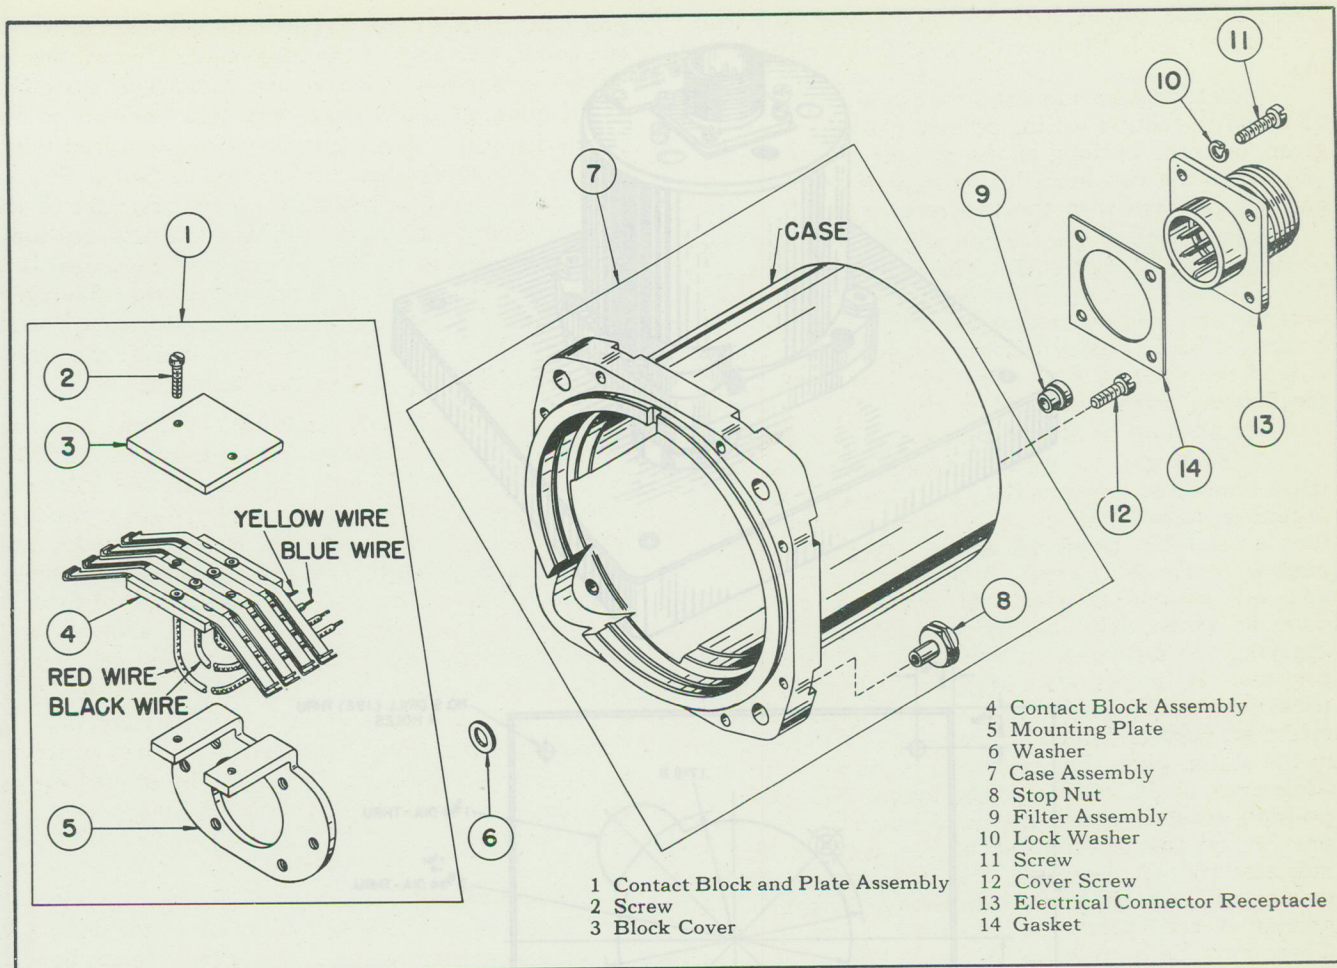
A—Exploded View—Case and Contact Assembly—Indicator—Type AN 5730-2A, Navy Stock No. R88-I-803 (Pioneer Type 10078-1T-A1)
